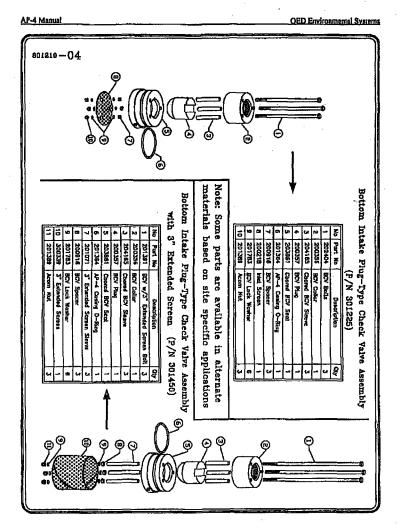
Bottom Intake Plug-Type Check Valve Assembly
